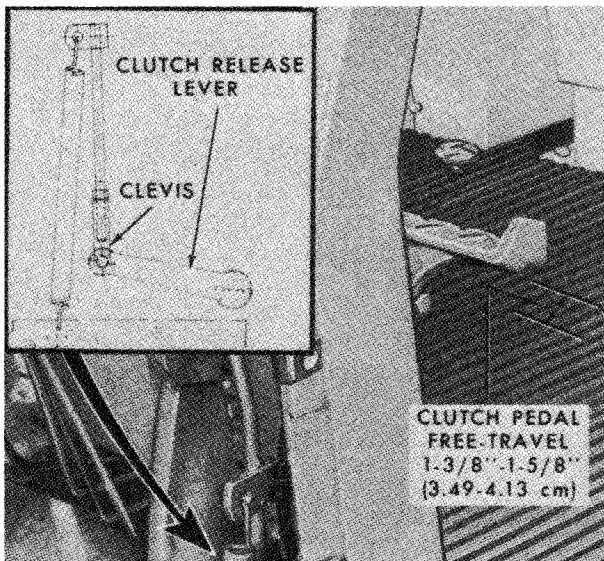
Clutch pedal free travel should be 1-3/8 to 1-5/8 inch when measured at pedal. Adjust by turning clevis on pedal to clutch release lever rod.
